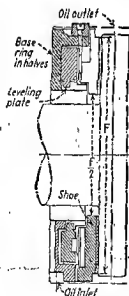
Left Half of Six-shoe Self-aligning Equalizing Horizontal Thrust Bearing for Load in Either Axial Direction.
